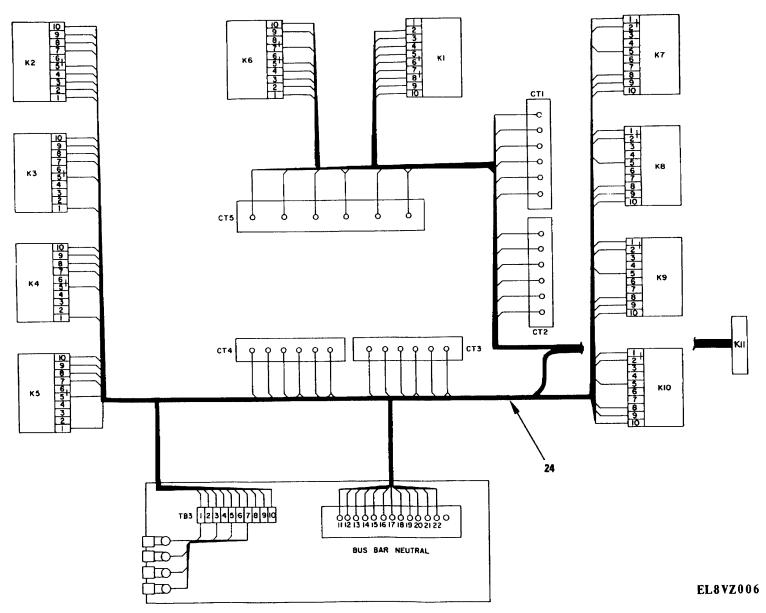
Power Control Assembly and Wiring Harness (Sheet 2 of 2).
